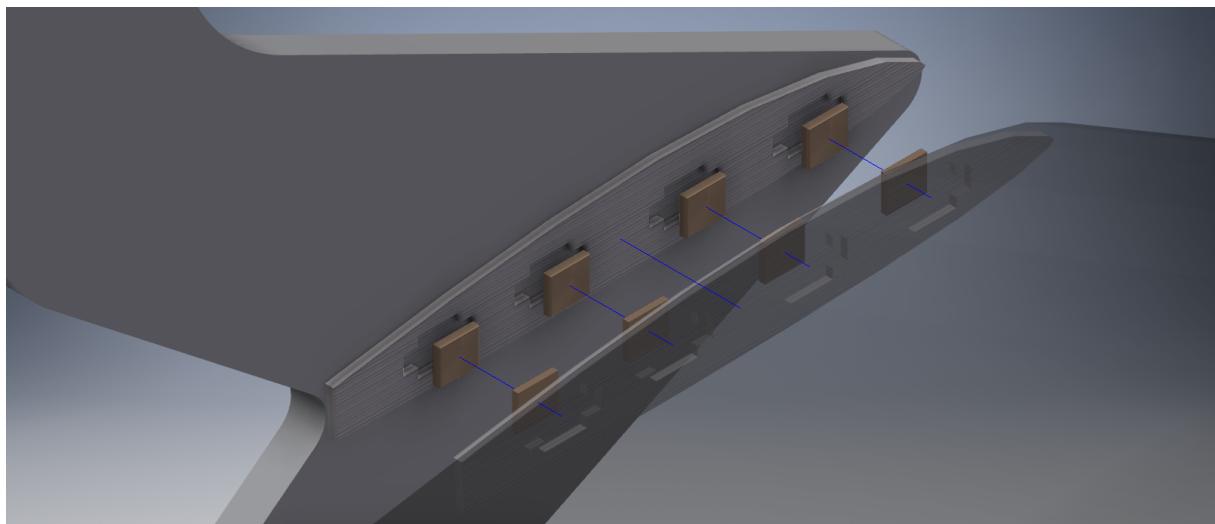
3D-printed magnetic coupler and winglet assembly.
